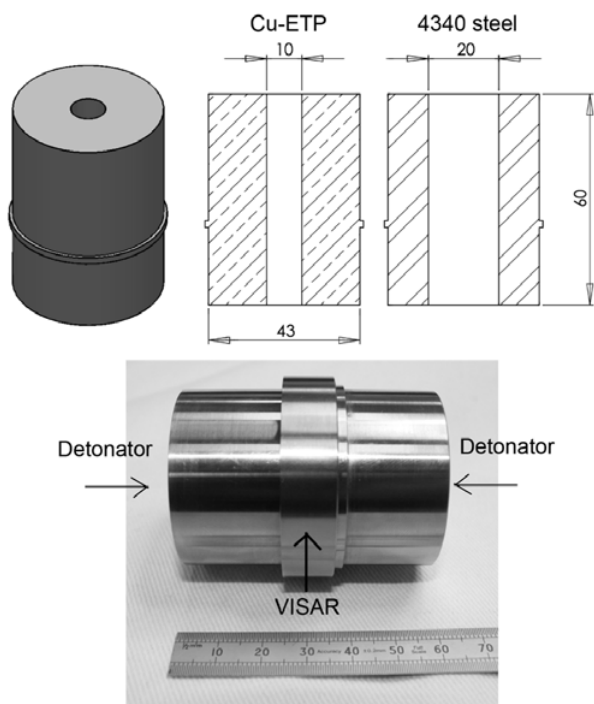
Top: Dimensions of the copper (left) and steel (right) drivers. Bottom: Steel driver & 12 mm Ti64 ring.
